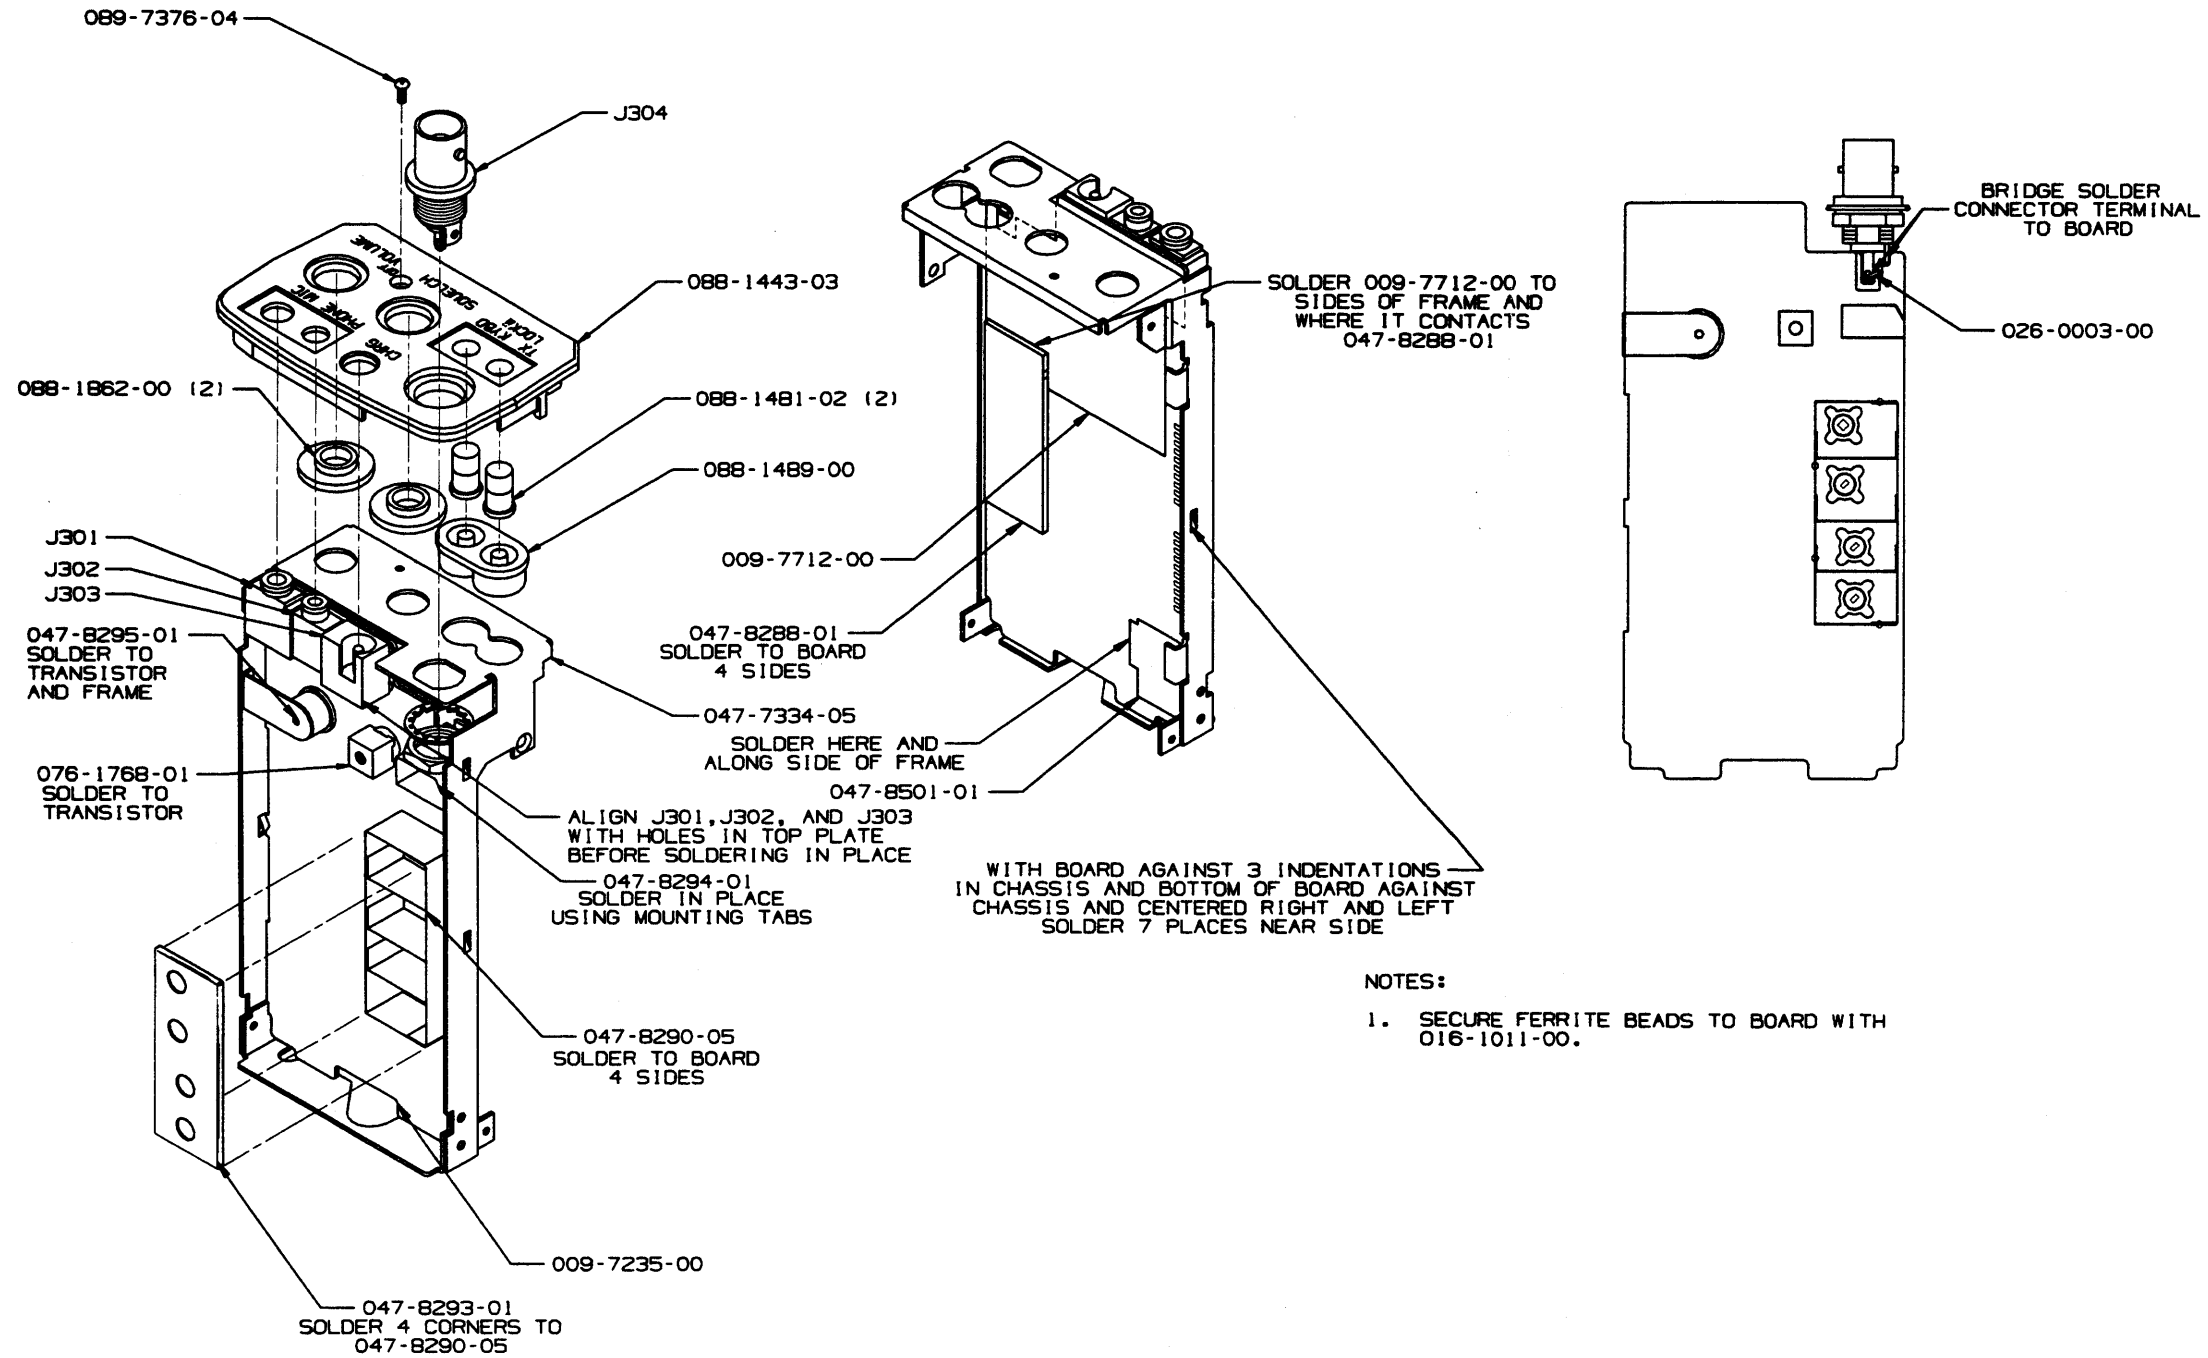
RECEIVER/TRANSMITTER BOARD ASSEMBLY
